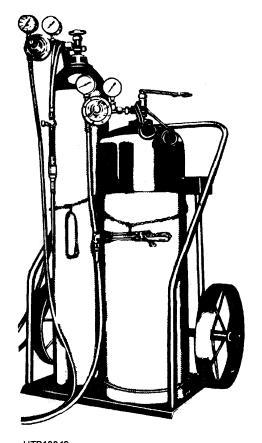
Portable oxygas welding and cutting outfit.
